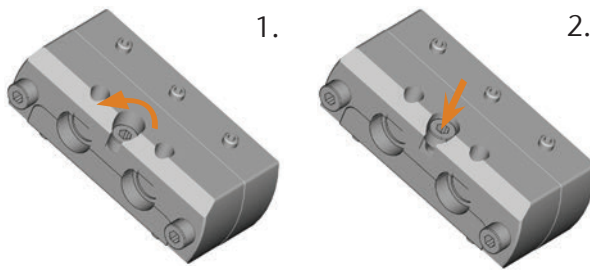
OPENING THE PREFACE® ABUTMENT HOLDER
